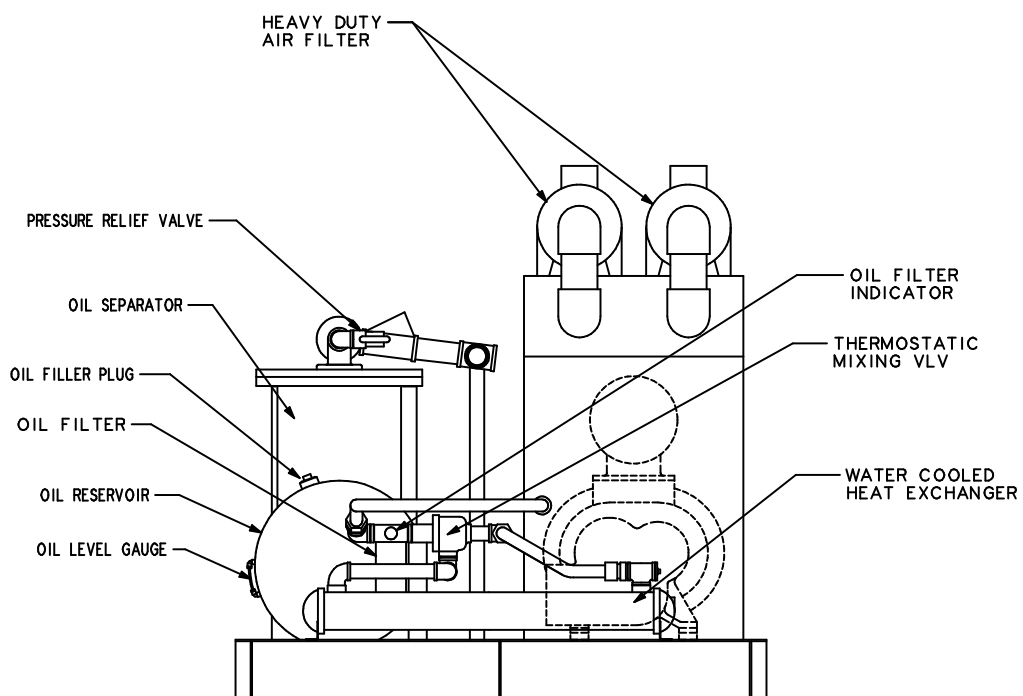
PACKAGE - UNIT WITH WATER COOLED AFTERCOOLER
